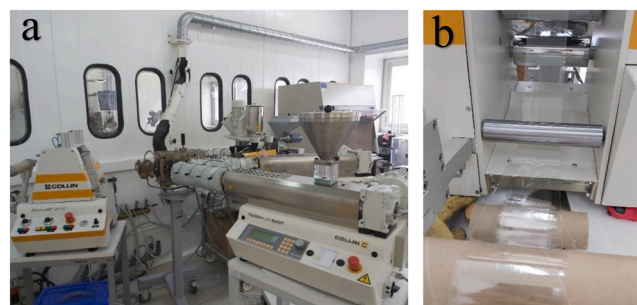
Cast-roll machine used for the production of flat films (a) with detail of the calender flat-film system (b).
